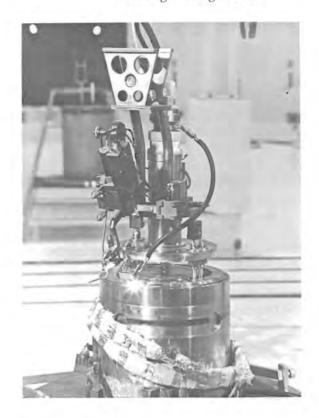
Canister Closure Lid Being Seal Welded
